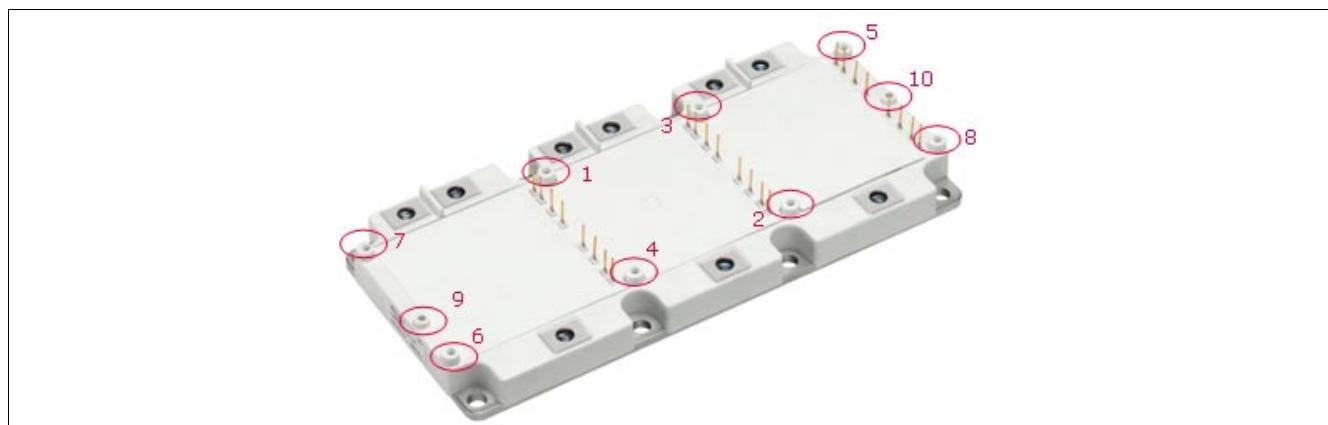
PCB Mounting Stand-offs of HybridPACK™2
